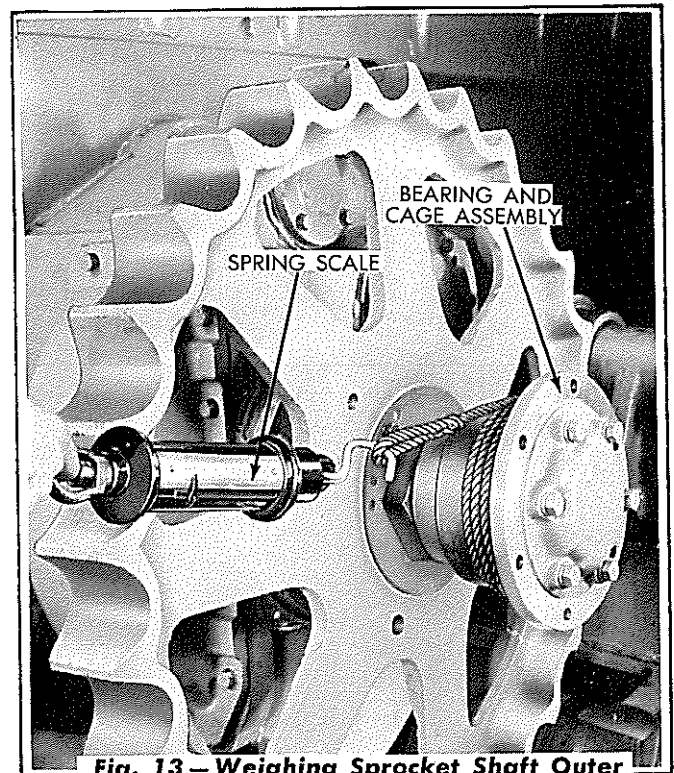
Weighing Sprocket Shaft Outer Bearing Pre-Load
